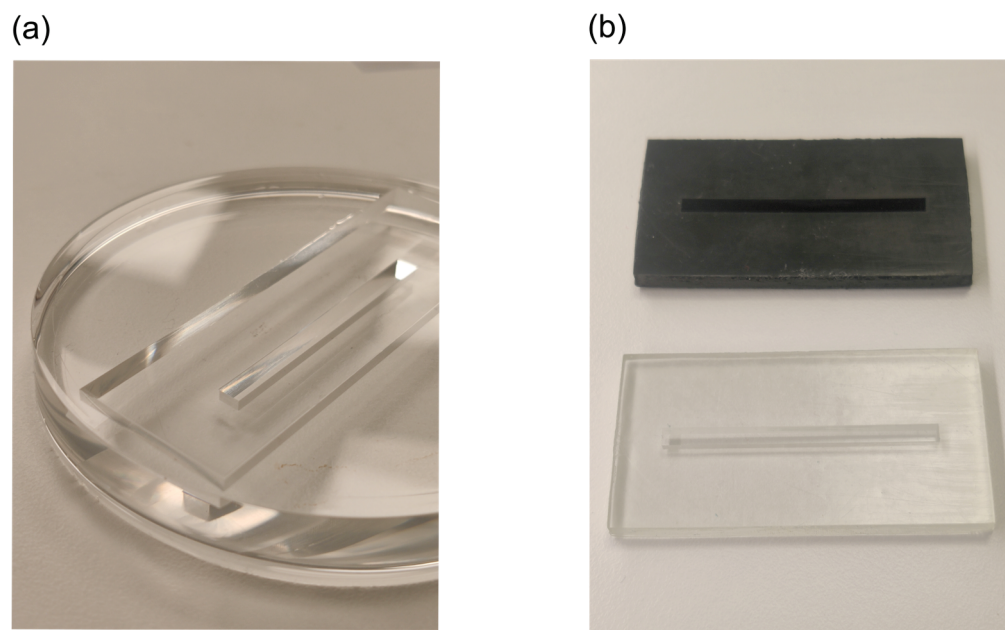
Manufacturing molds: (a) silicone mold, (b) 3D-printed molds: transparent (bottom) = ABS-like resin; black (top) = traditional resin.
